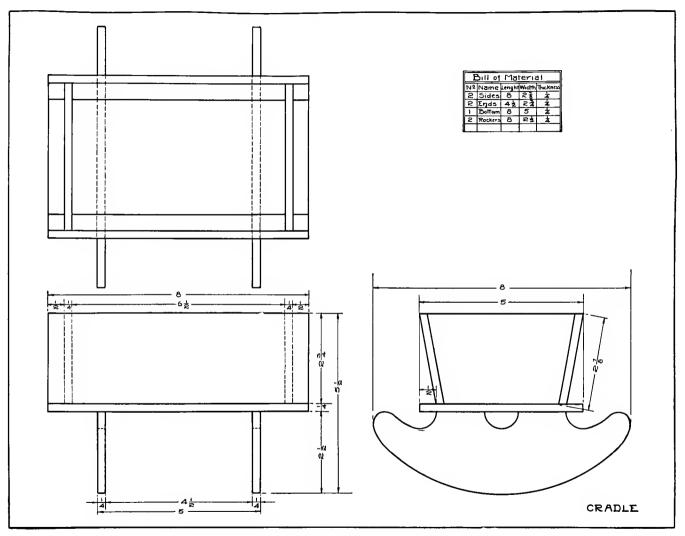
Working Drawing of Cradle (Sixth Grade)
